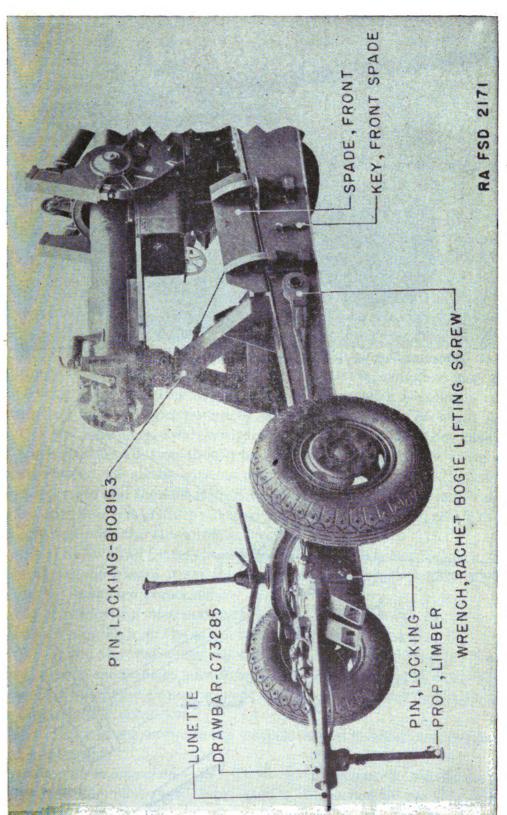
155-mm gun carriage M1, traveling position—limber end.
